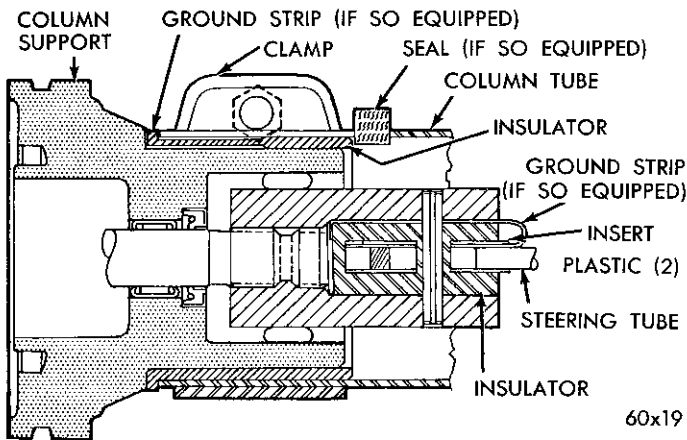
Jacket Tube and Column Tube (Cross Section)
